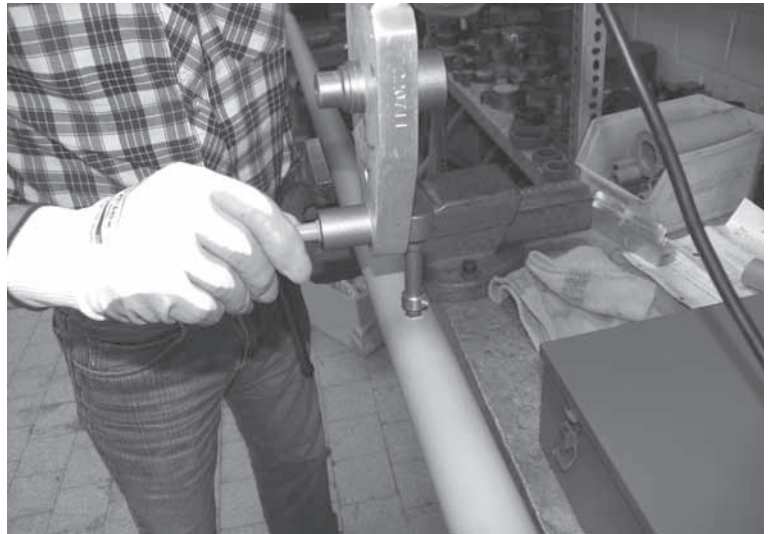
Pre-heat the borehole and the welding plugs with the repairing-set for 15 seconds.
